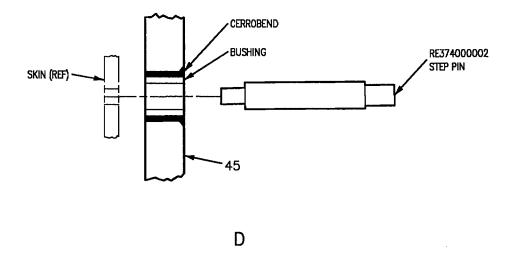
Drilling Holes in 74A110953 Hinge Half Assembly (Sheet 2)
